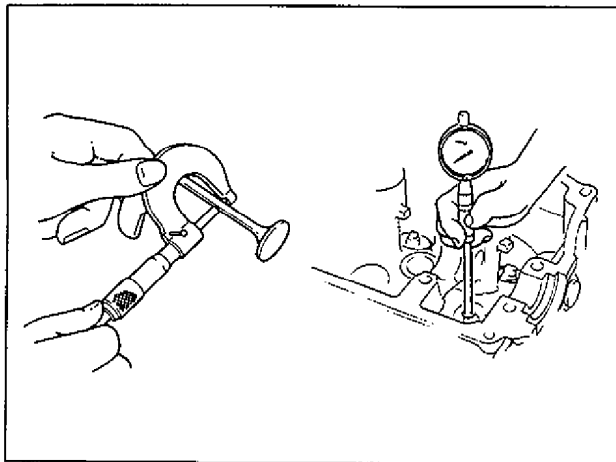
A-83 Valve Stem Dia. and Valve Guide I.D. Measurement
